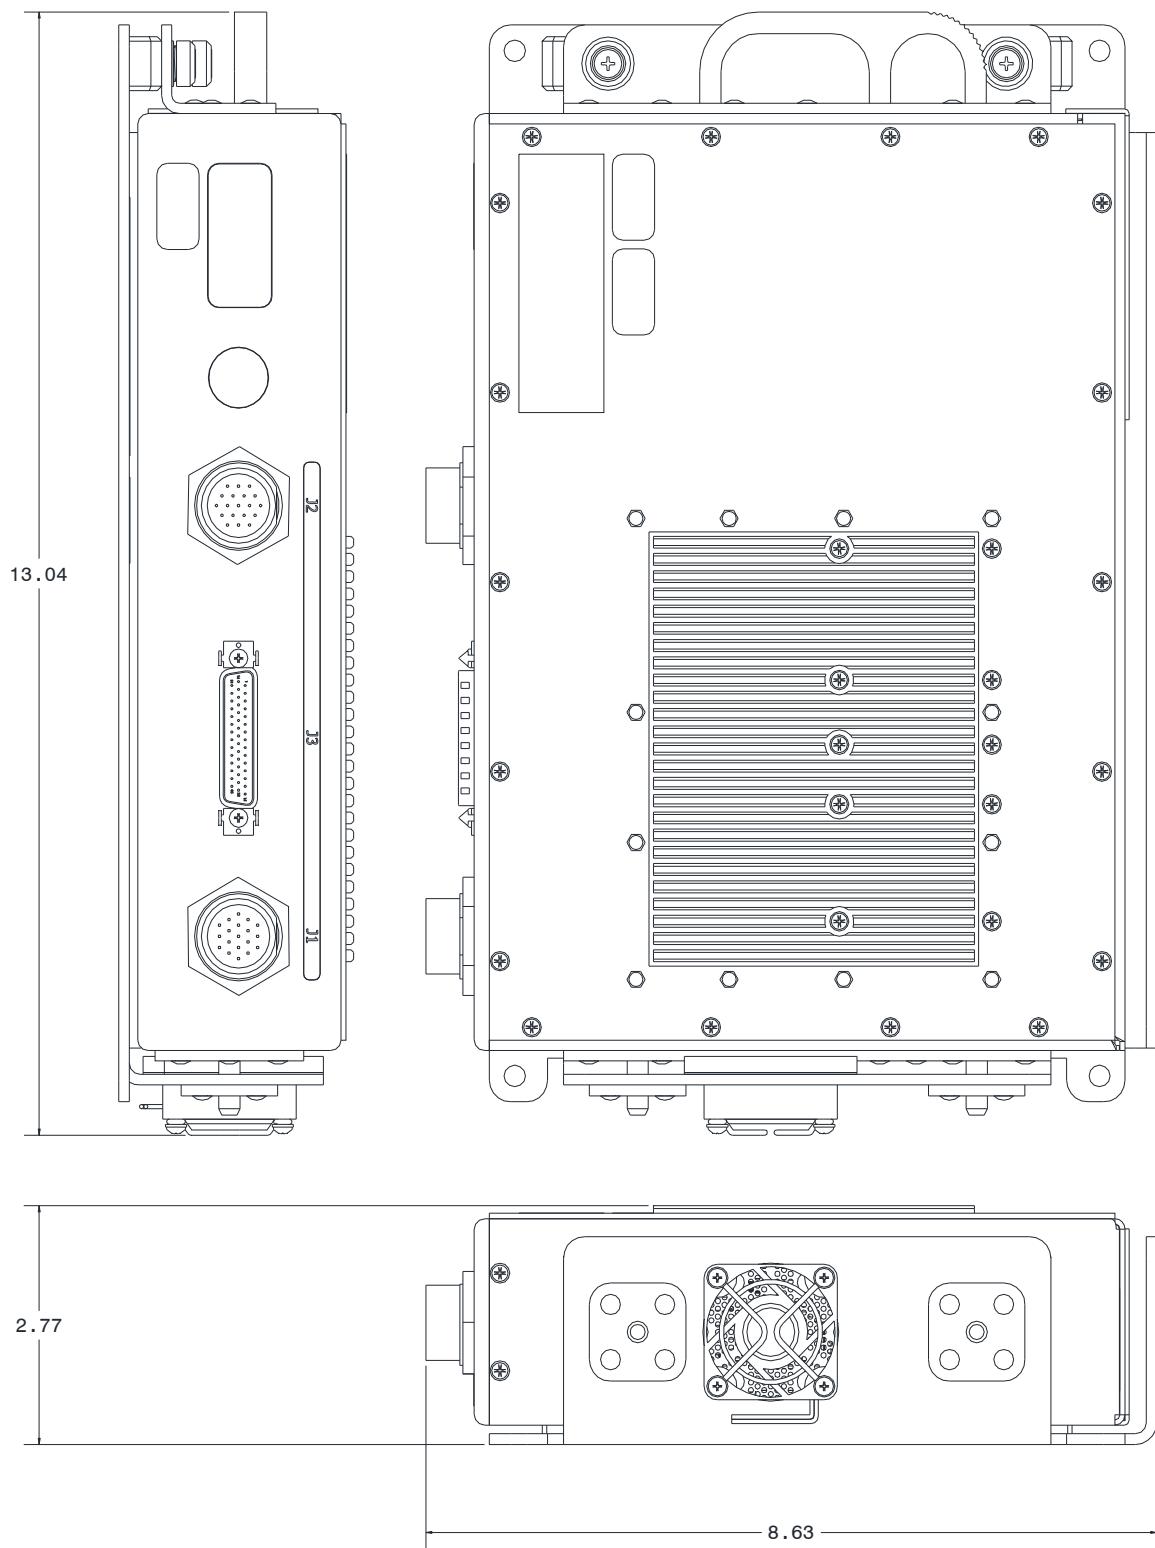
1069-4000-03/13, Remote Processor Unit (In Mount, 1069-6001-06)
